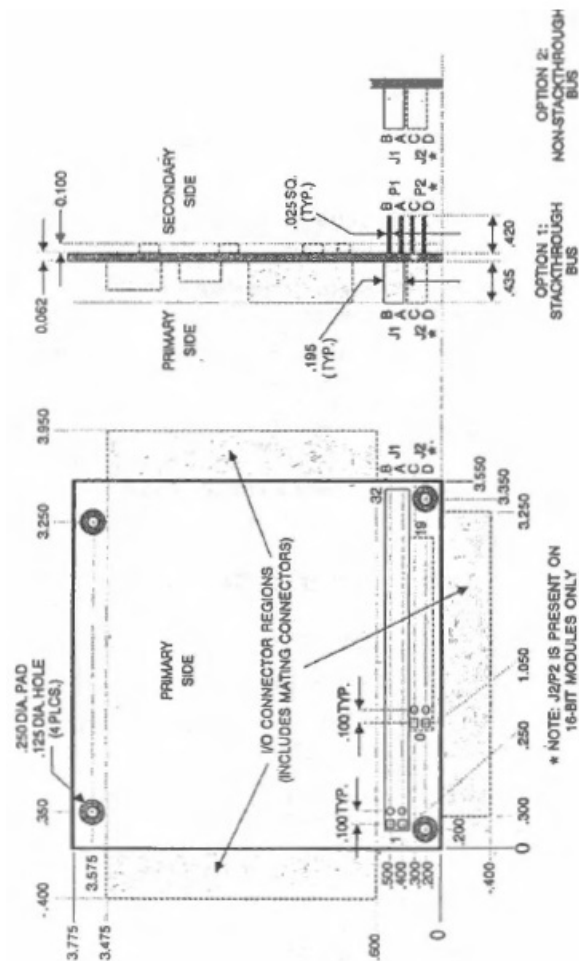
PC/104 Module Dimensions (Dimensions are in inches, ± 0.005)
